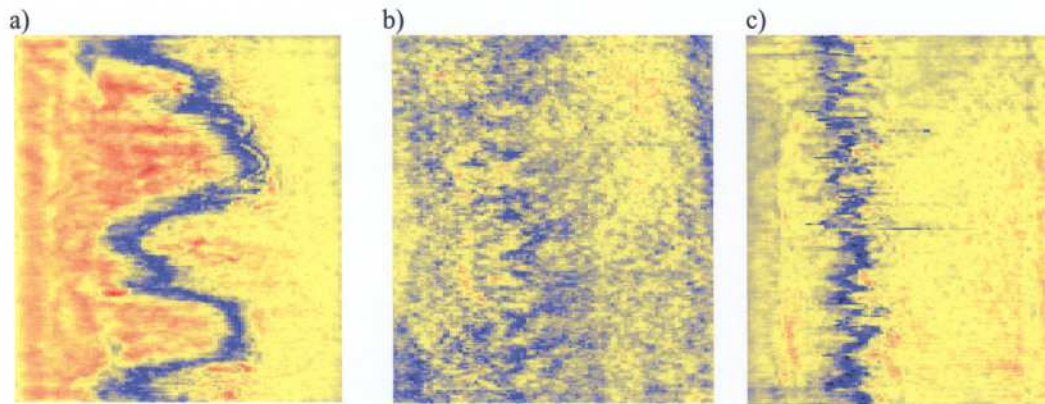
SAFT image of sub-surface planes in the 3 butt joint specimens performed with a welding speed of a) 0.75 mm/s, b) 9.0 mm/s and c) 15.0 mm/s
